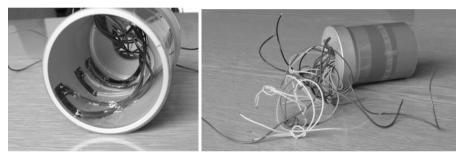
The inner metal parts were furnished with strain gauges before the manufacture of the composite part (RTM process).
